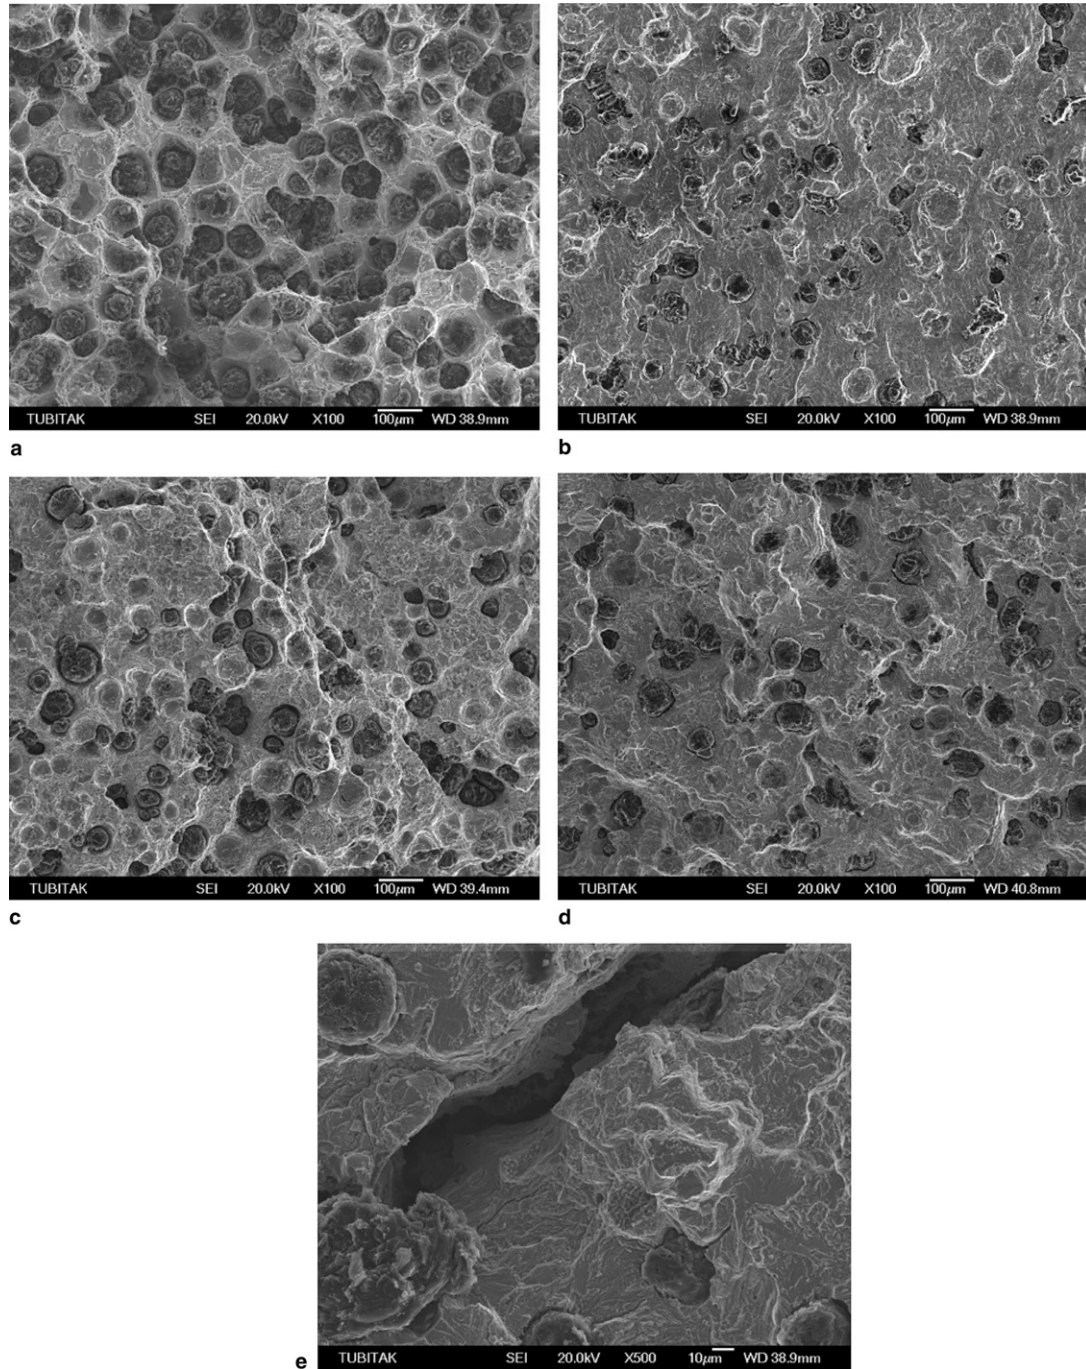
(a) SEM fractographs of cast-ductile iron fatigue specimen. (b) SEM fractographs of austempered fatigue specimen at 230 °C for 60 min. (c) SEM fractographs of austempered fatigue specimen at 330 °C for 60 min. (d) SEM fractographs of austempered fatigue specimen at 430 °C for 60 min and (e) SEM fractographs of austempered fatigue specimen at 330 °C for 60 min.
